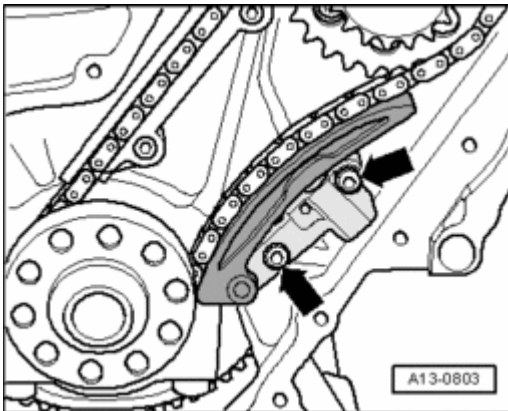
Unscrewing Chain Tensioner For Drive Chain For Valve Gear
